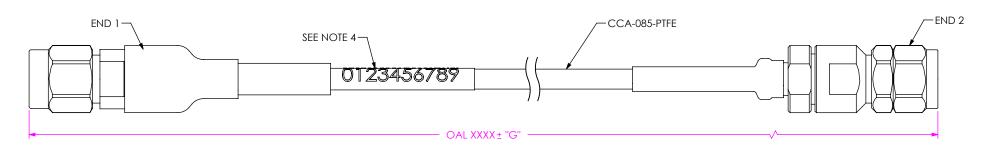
RF085-92SP-24SP-XXXX SHOWN (PROTECTIVE CAPS NOT SHOWN FOR CLARITY)
